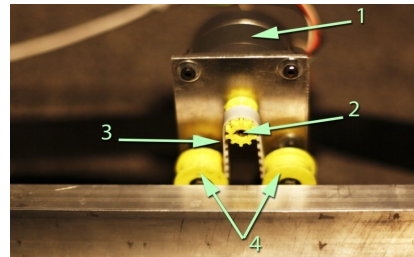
Driving system: 1 - step motor; 2 - pulley mounted on the motor shaft; 3 - tooth belt; 4 - belt guide wheels with ball bearings
